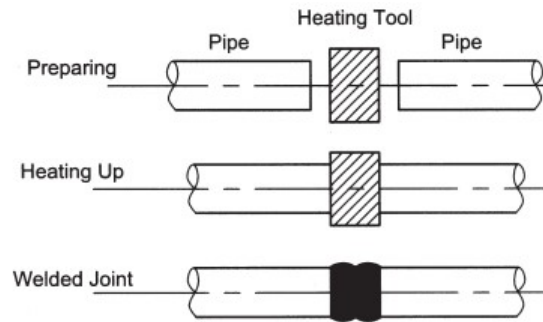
Butt Welding Procedure of PE Pipes
